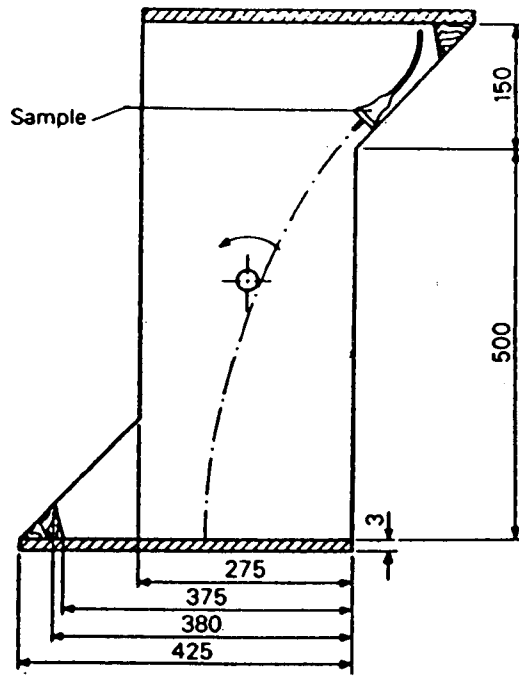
MOUNTING SUPPORT FOR SAMPLE
